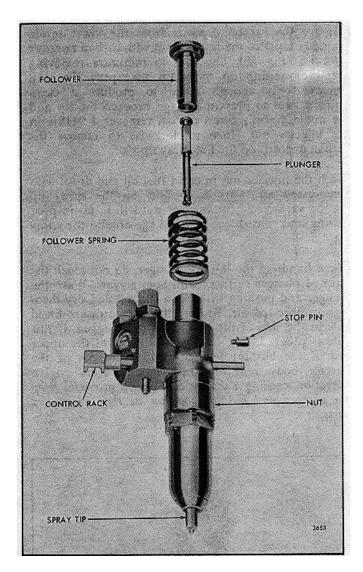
Injector Plunger, Follower and Relative Location of Parts
